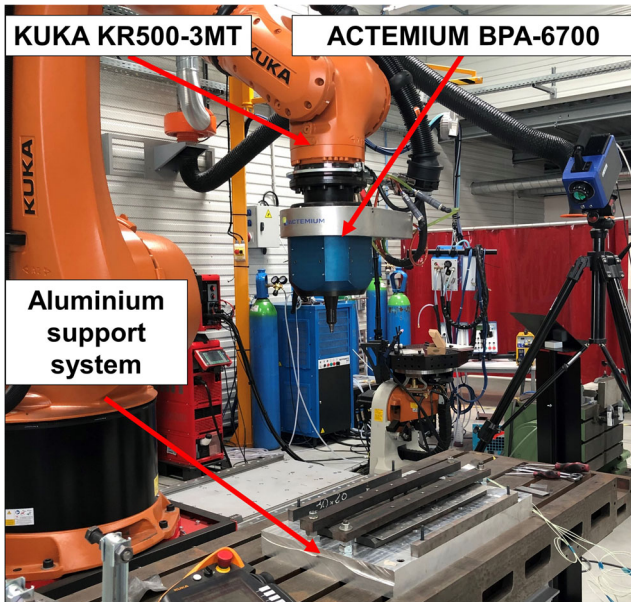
Welding setup showing robot, spindle, and support system
